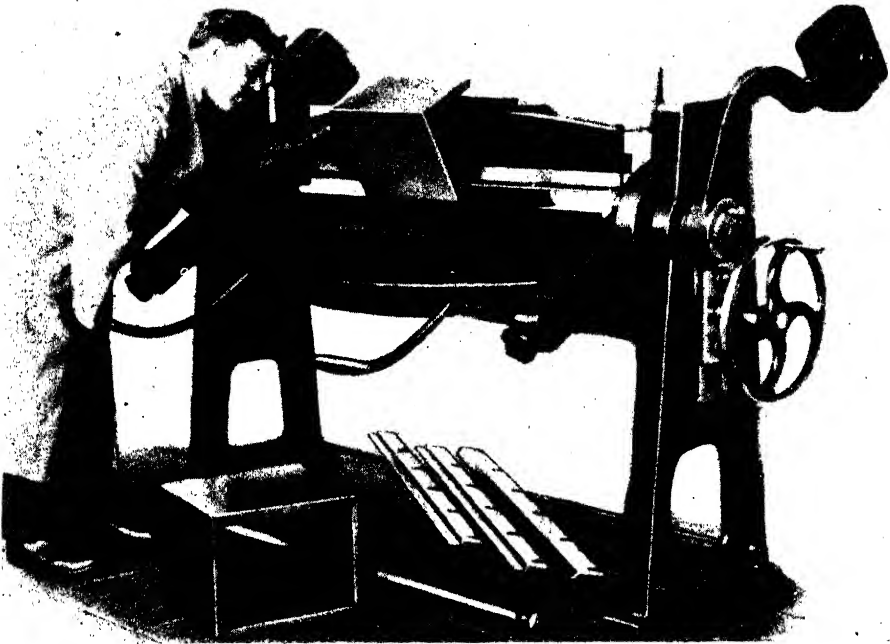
UNIVERSAL SWING BEAM FOLDING AND BENDING MACHINE
